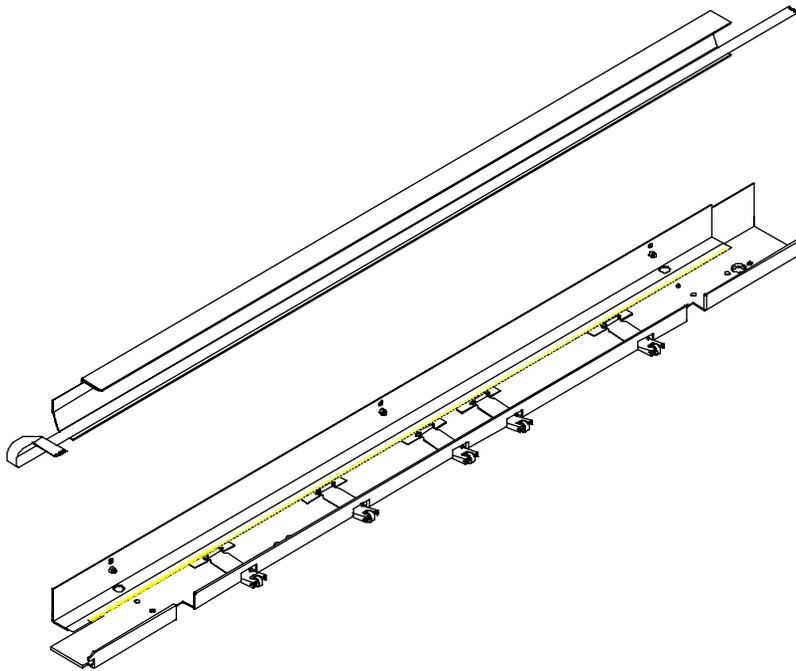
Trailing Cable Assembly Removal/Installation.
